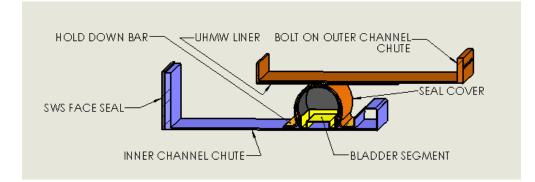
Cross Section View of Primary FSS to SWS Seal Assembly
